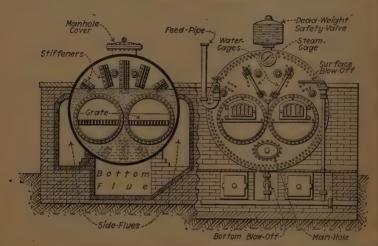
Front-end and cross-sectional views of a pair of Lancashire boilers.
